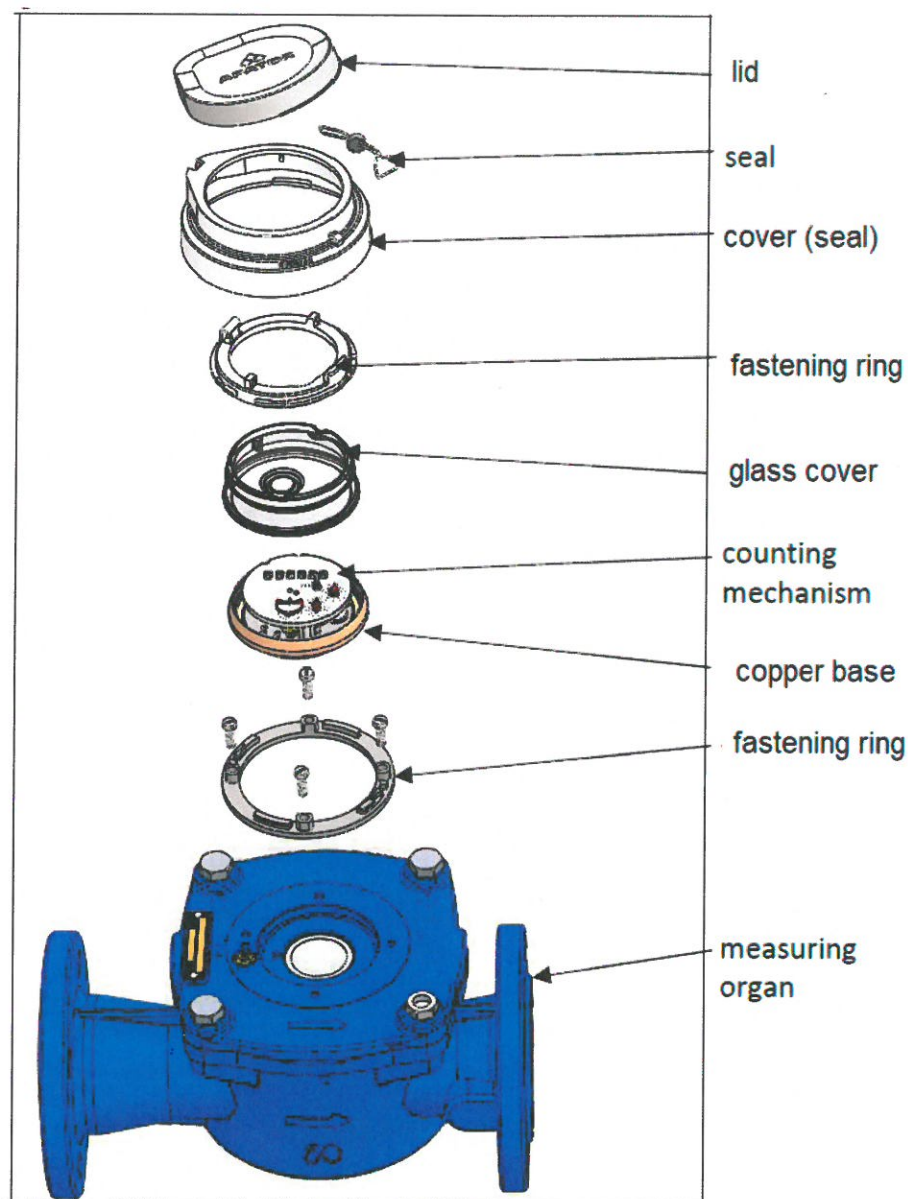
Illustrative exploded view of the water meters type JS...-08 with IP68
